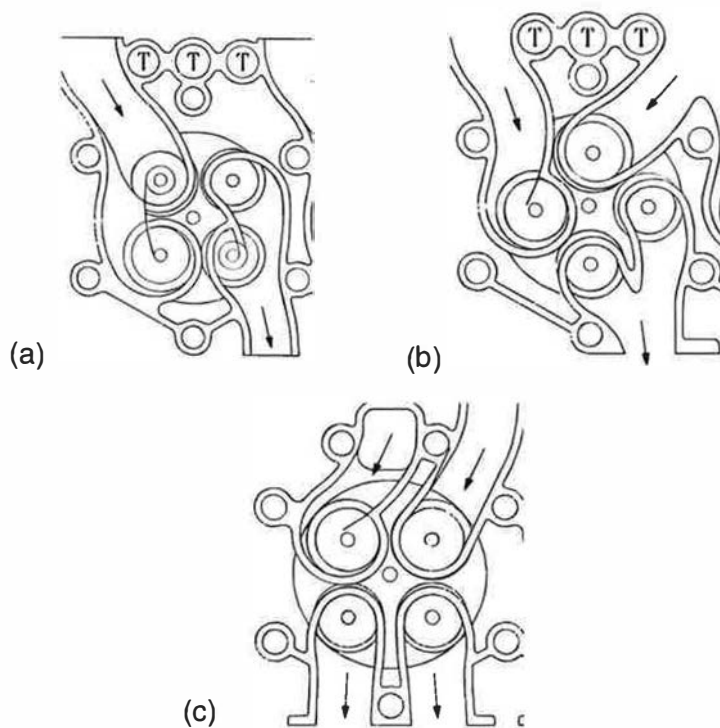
Multivalve cylinder head configuration (Gale 1990)
